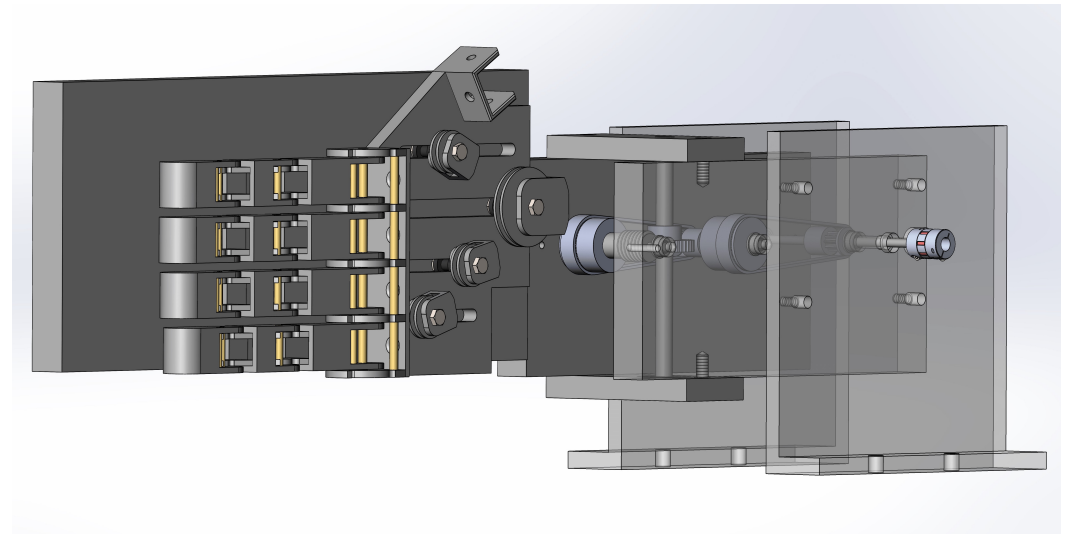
CAD assembly of a finger, printed in ABS plastic and using metallic shafts for both joints and guides. A clearance of 0.2 mm was used to reduce friction upon assembly. Two elastic bands are attached across the joints, using the small extrusions beneath the fingers. An additional elastic band is attached from beneath the hand plate to the proximal phalanx extrusion.
